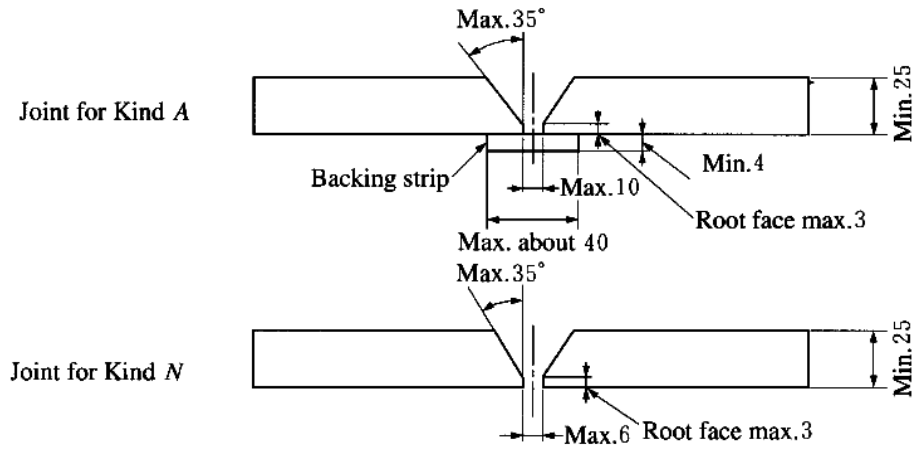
Dimensions and Types of Test Assemblies for Plates of Grade 3
